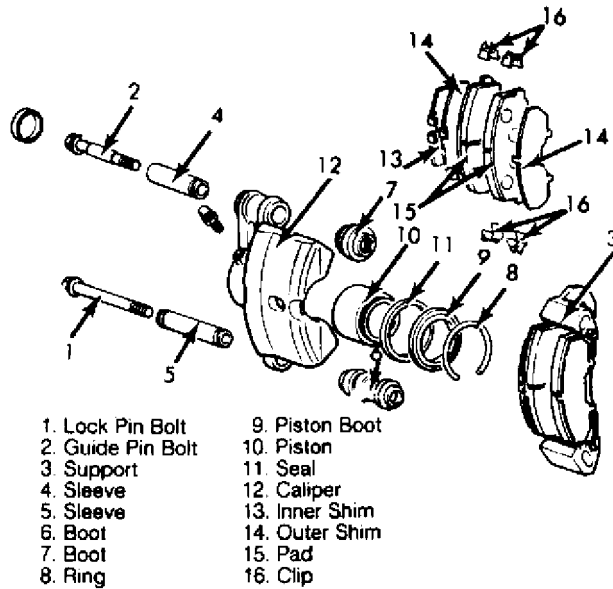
Exploded View Of Front Disc Brake Assembly (Typical Single Piston)
